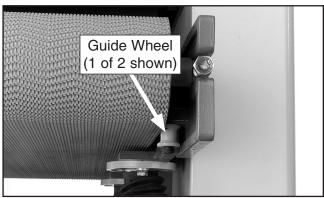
Conveyor belt guide wheels (Emergency Stop plate removed for clarity).
